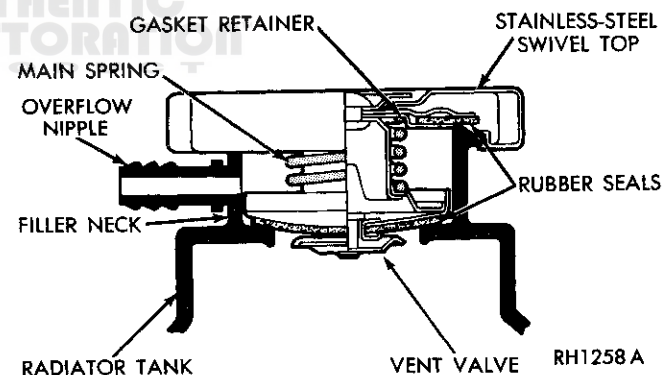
Radiator Pressure Cap and Filler Neck—Typical
